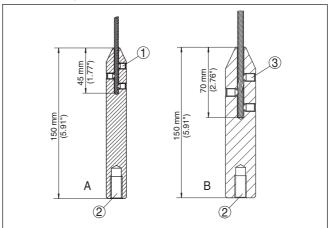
Shortening the cable probe - Cable ø 6 mm
